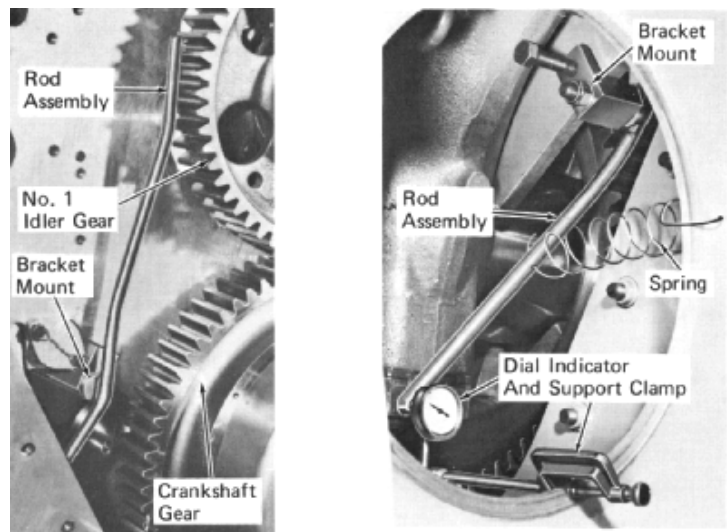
Application Of Parts For Checking Bearing Clearance
